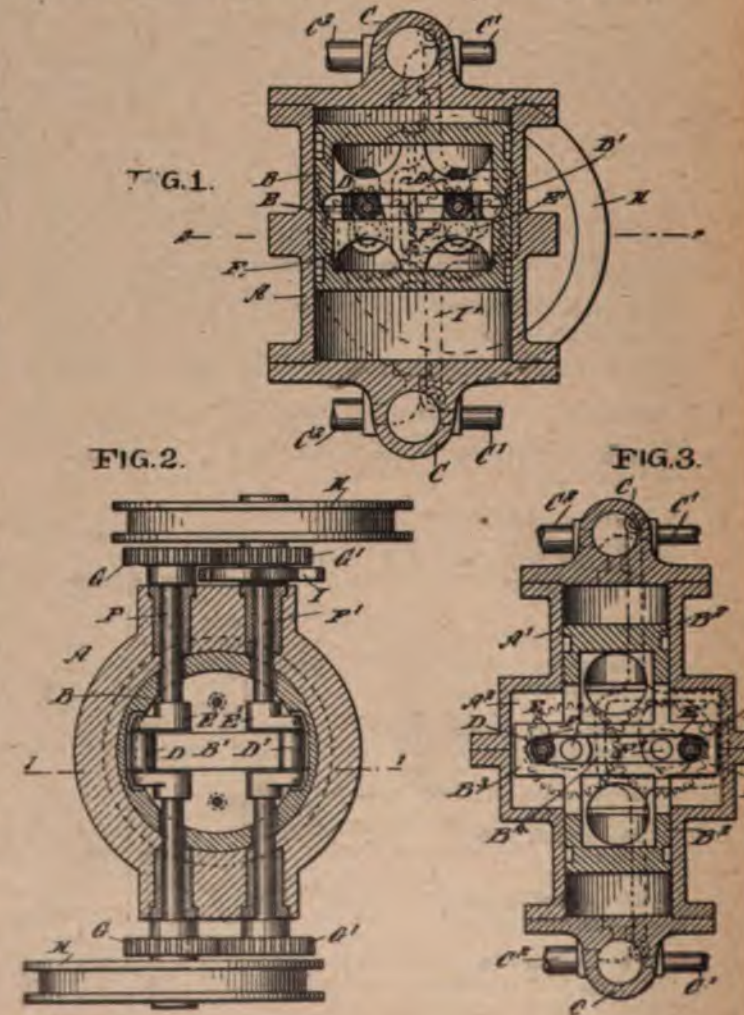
is a sectional side elevation of the improvement on the line 1-1 in Fig. 2. Fig. 2 is a sectional plan view of the same on the line 2-2 in Fig. 1, and Fig. 3 is a sectional side elevation of a modified form.
